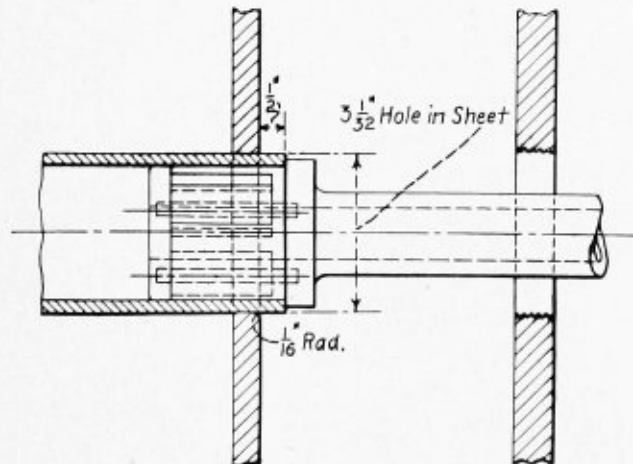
Chamfer outer edge of hole with 16-inch radius; apply tube and expand same with roller expander to fit $3 \frac{1}{32}$ -inch hole in sheet. The handle of the expander, being smaller than the hole in the outer sheet would allow the hole to be offset from the center of the tube and still permit the use of the expander
